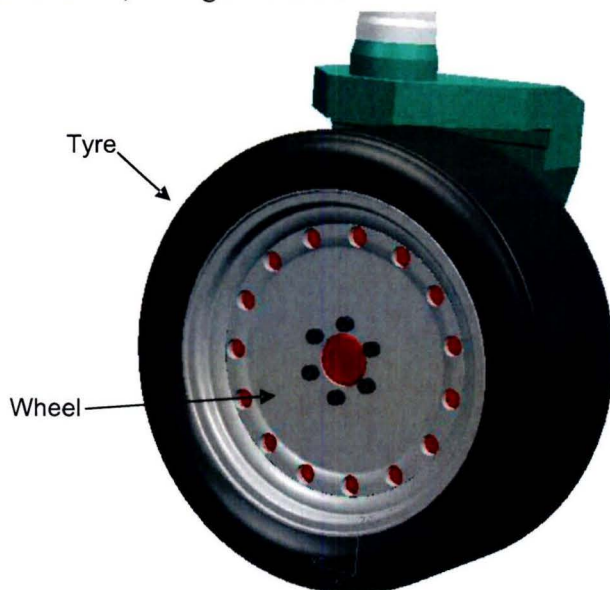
Wheel carrying arm with adapter, clamping ring, wheel motor, cover disc and wheel with tire
